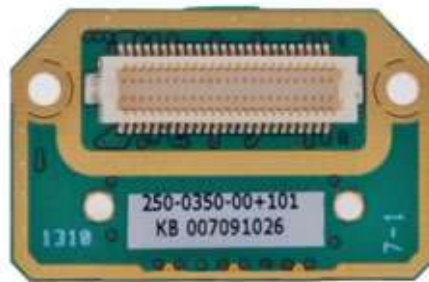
Wearsaver PCB for FLIR Tau IR camera.
